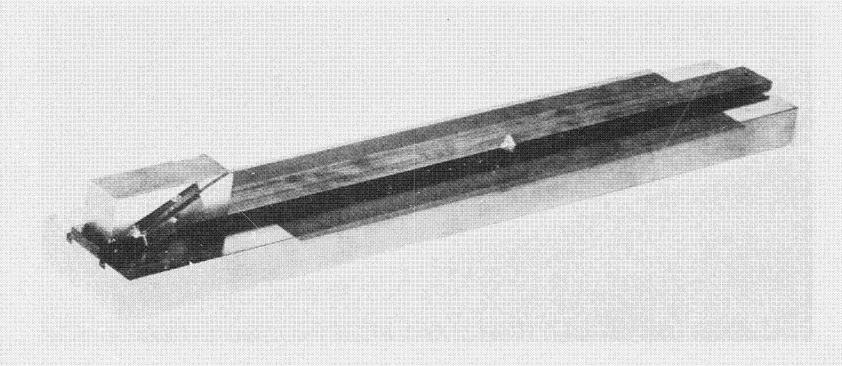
Apparatus for Cutting Specimens, Assembled
